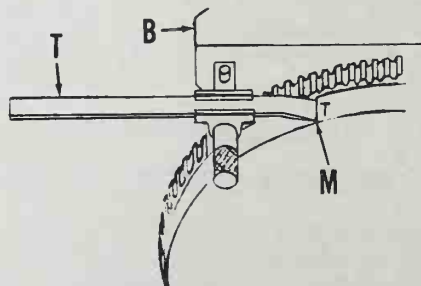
With timing tool 2068 (T) attached to cylinder block (B) as shown, number 1 piston is at TDC when TDC mark (M) aligns with tool point.
